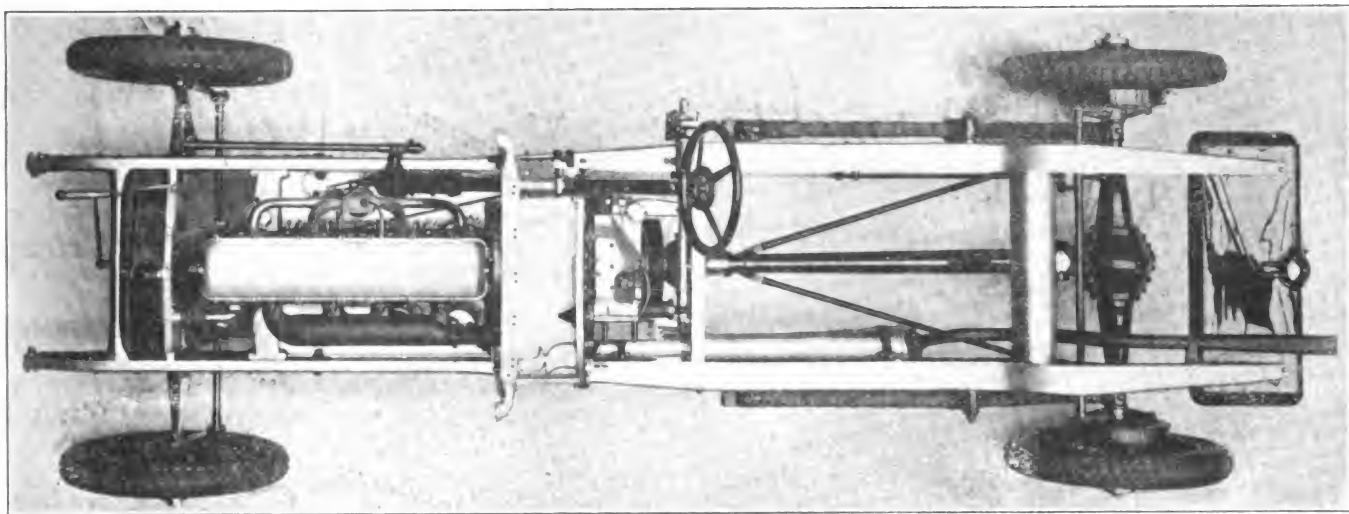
Plan view of Lanchester 40 horsepower, six-cylinder chassis
